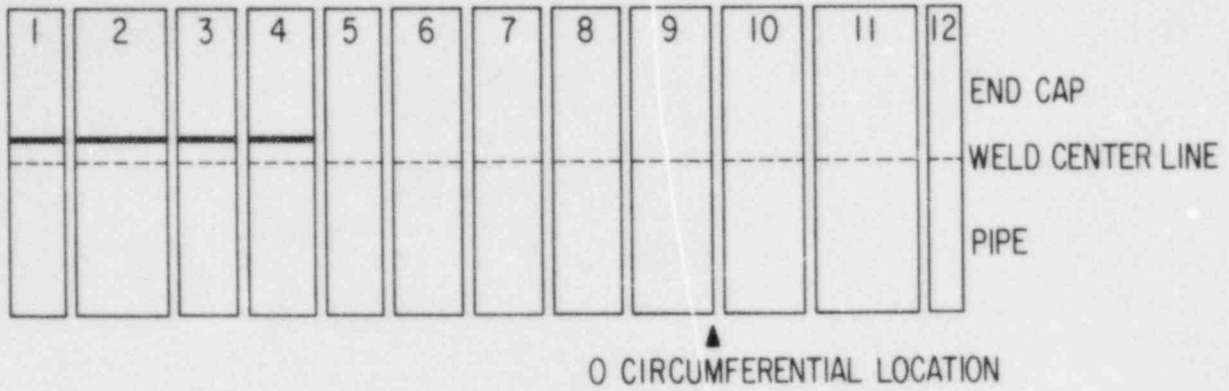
Hatch-2 End Cap Weldment (No. 2B31-1RC-22BM-4) Sectioned to Examine Cracking (Viewed from the OD). The sections containing cracks (sections 1 to 4) are marked with xxxx.
